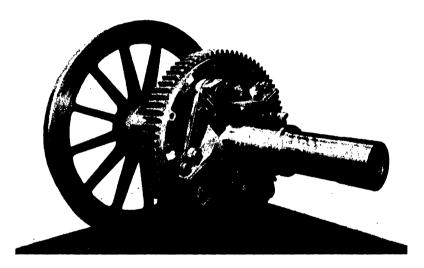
(ii) View of flexible gear with cover and half-wheel removed. Swiss 12,000 h.p. locomotive with Winterthur universal drive.
